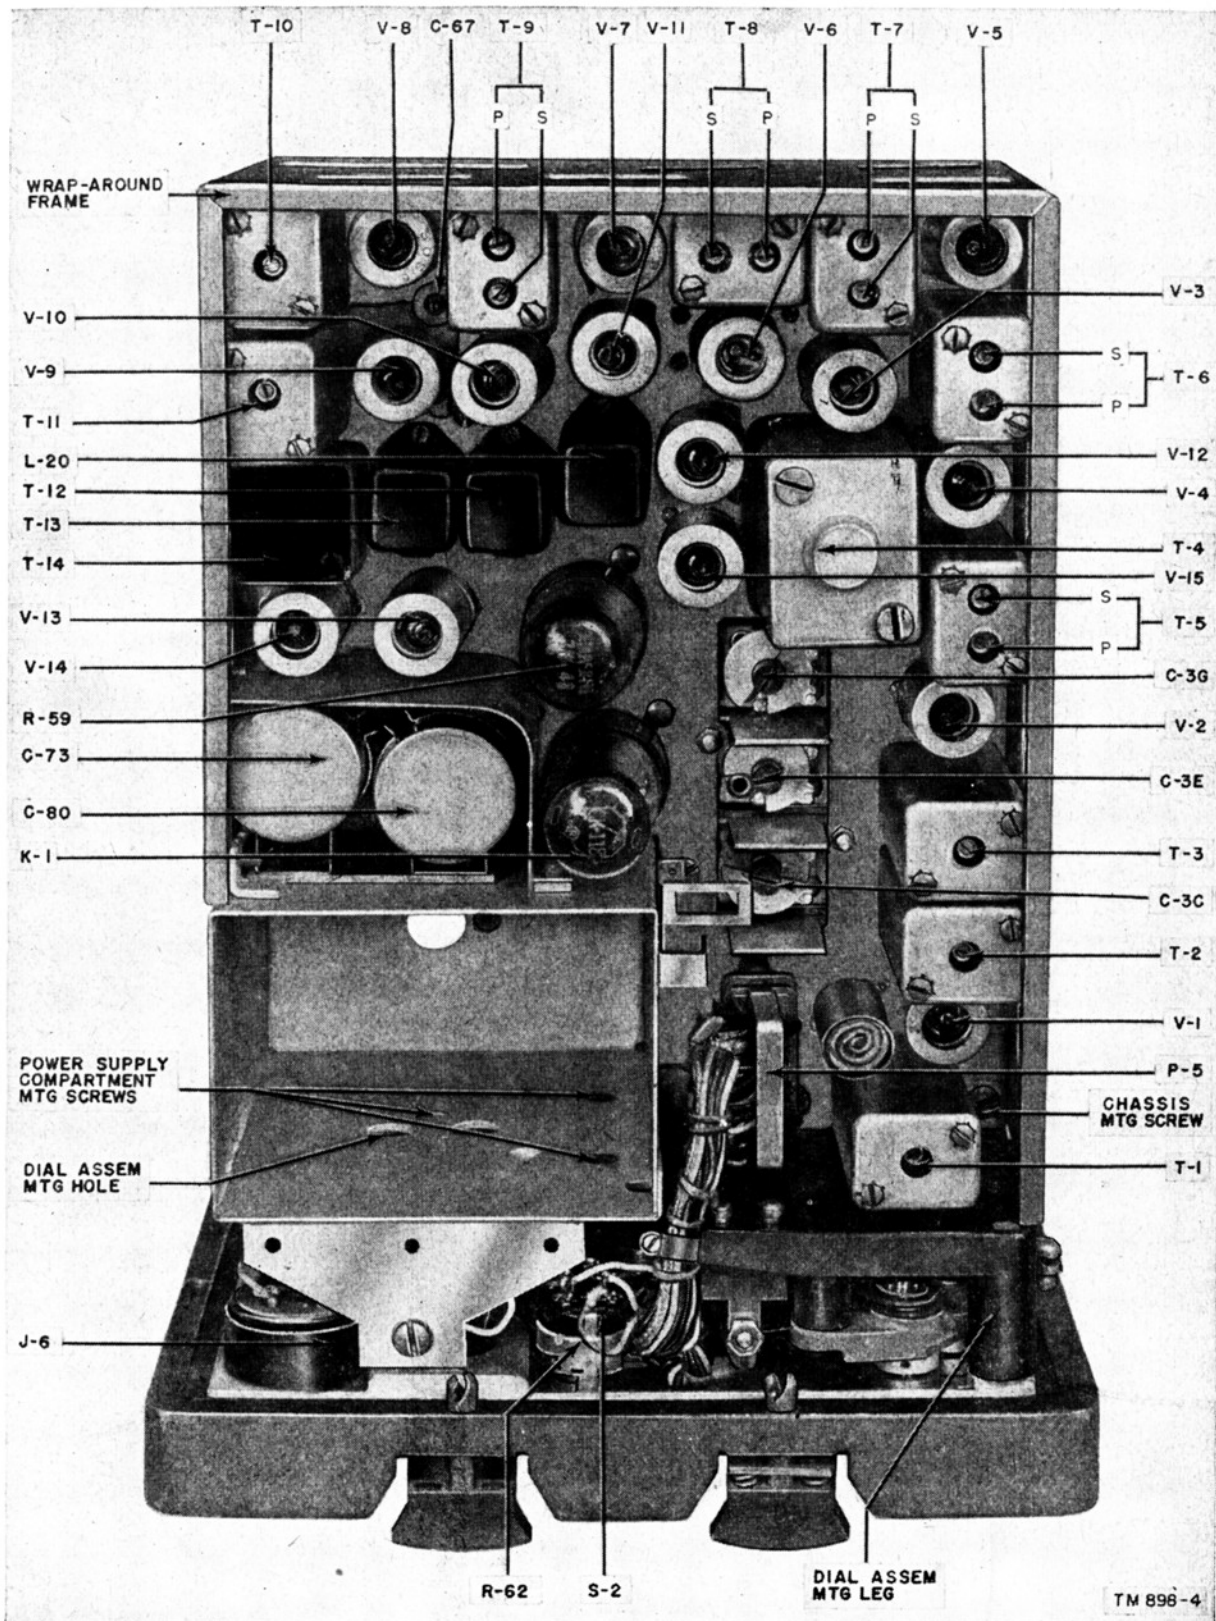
Typical radio receiver, case removed, component (left) side of panel-and-chassis assembly.
